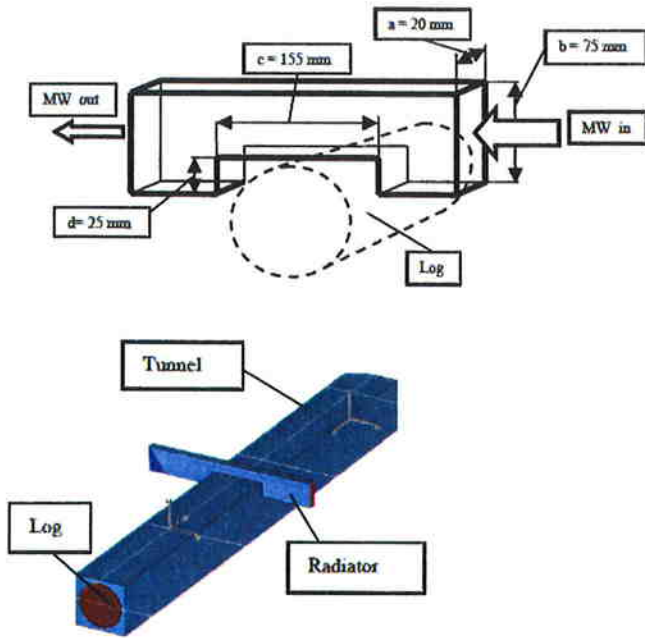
Radiating part of the applicator and its position on the tunnel a - size of narrow waveguide wall, b - size of wide waveguide wall, c - tunnel size (length of the open part of the narrow wall), d - depth of the cut in the wide waveguide wall.
